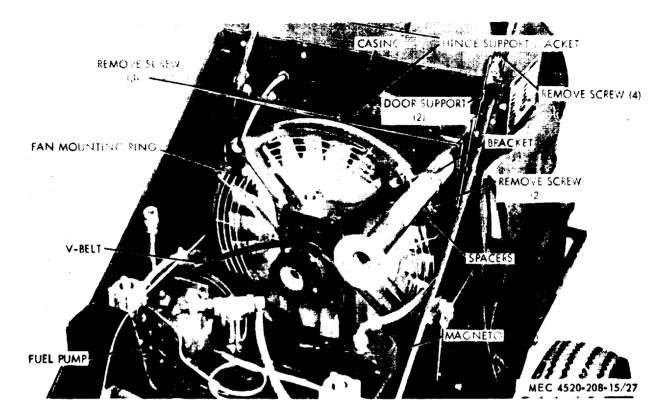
Fan mounting ring, removal points (BT400-40-1).
